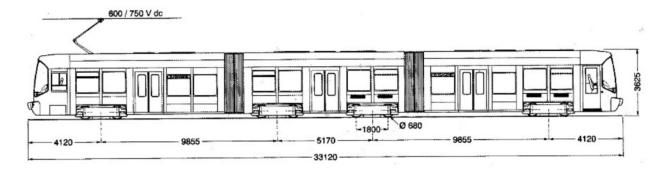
Technical drawing of SL95 with lengths given in millimeters [4].
